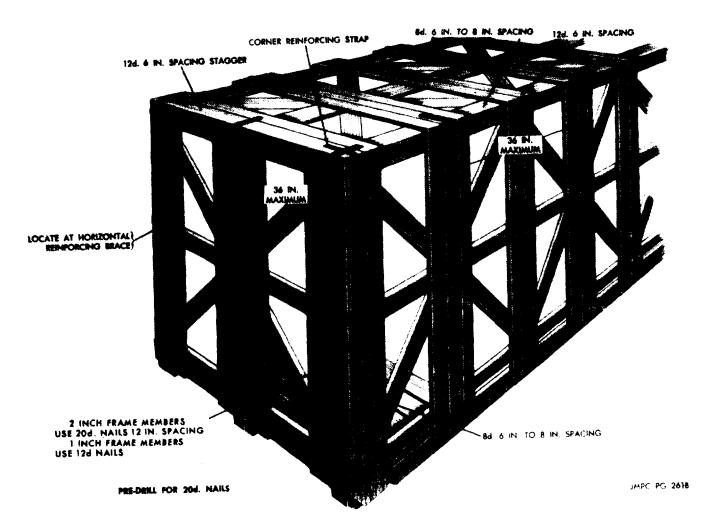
Assembly of open nailed crate (MIL-C-3774).
